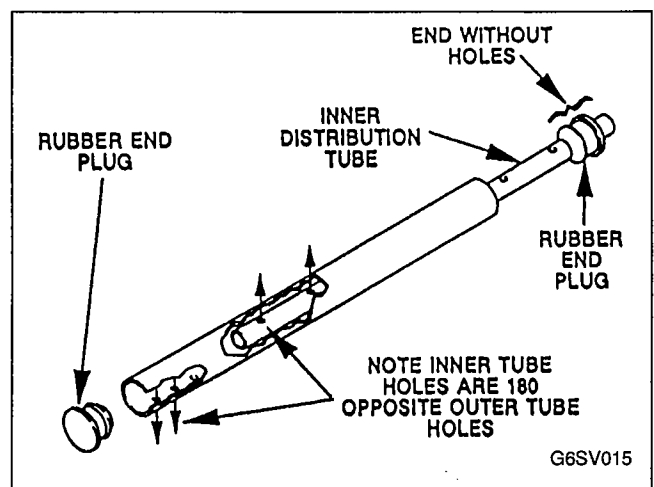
DISTRIBUTION TUBE DISASSEMBLY
